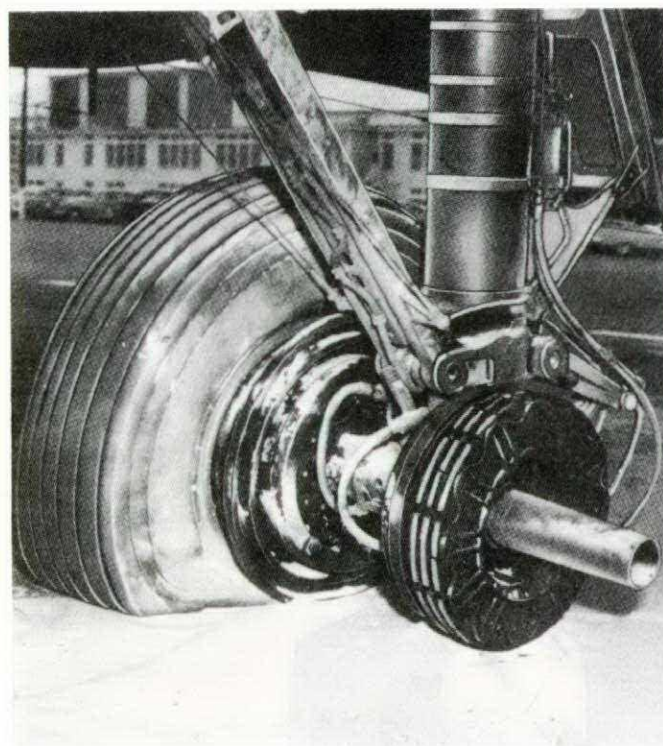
(a) — Left Landing Gear After Outboard Wheel Explosion
